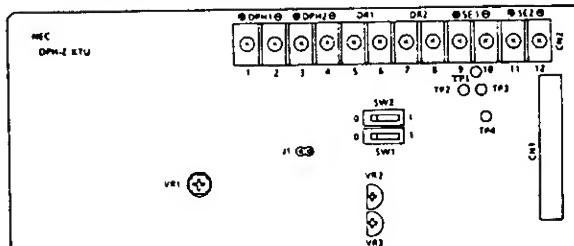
DPH-Z KTU Switch and Connector Layout
